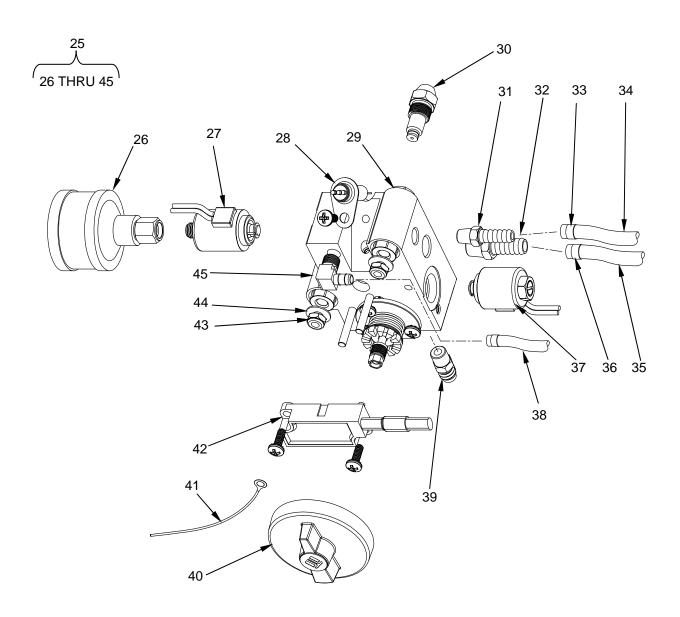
Fuel Delivery Block Assembly (Sheet 2 of 2).
